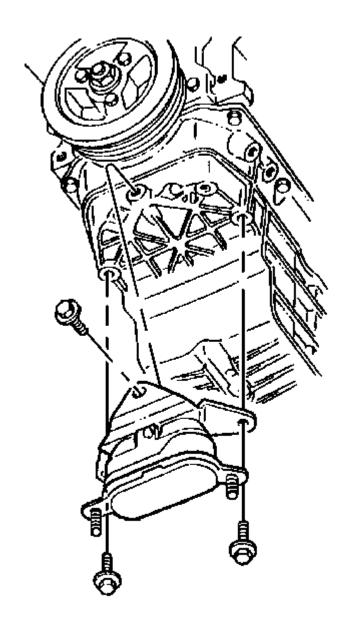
Installing Engine Mount & Bracket Courtesy of GENERAL MOTORS CORP.
